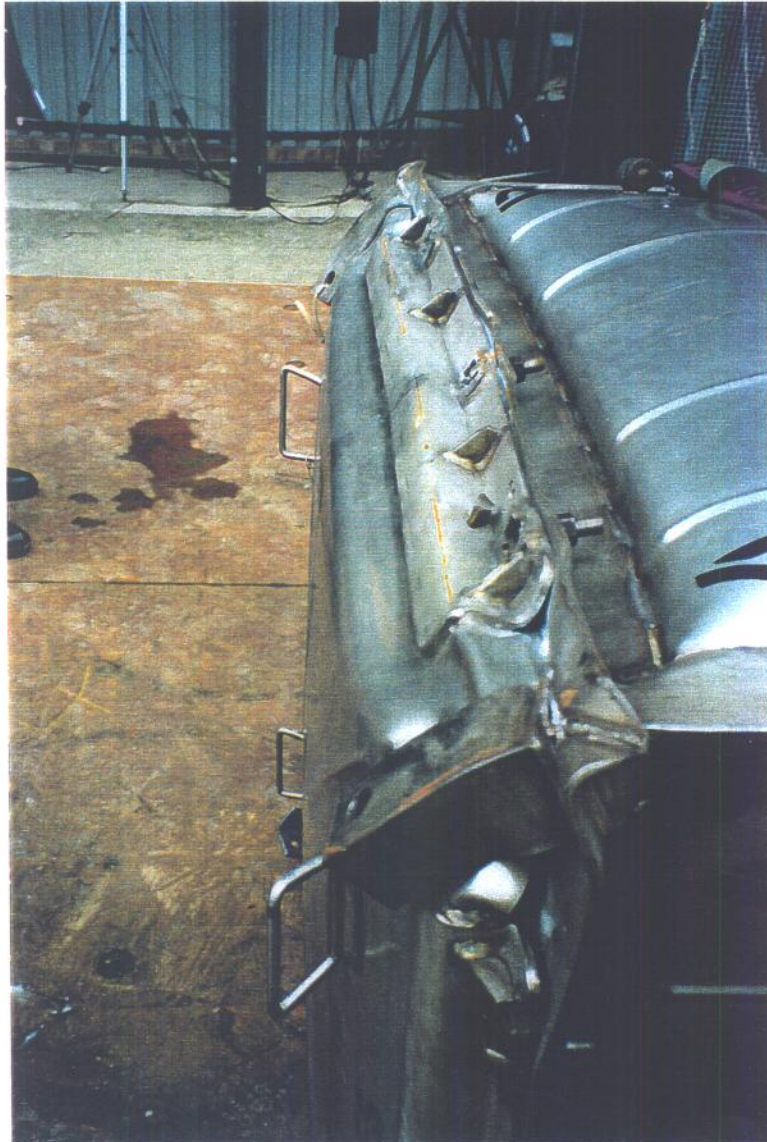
Damage to Edge A-B Following 1.0m Punch Test
